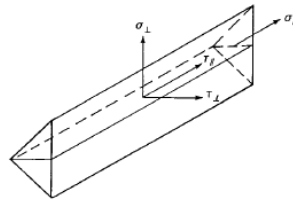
Stress on the throat section of a fillet weld
